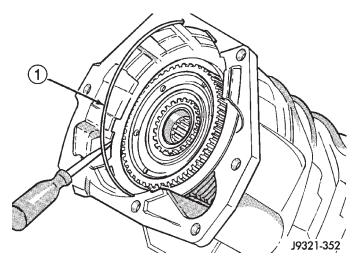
Overdrive Clutch Pack Retaining Ring Installation 1 – OVERDRIVE CLUTCH PACK RETAINING RING
